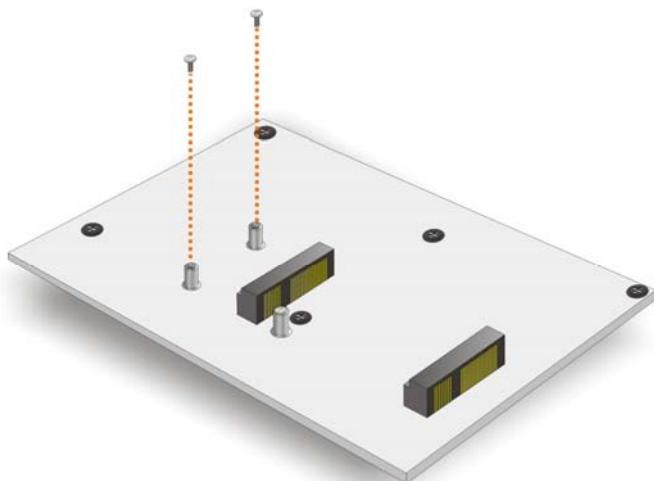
Remove the Retention Screws for the Half-size PCIe Mini Card
